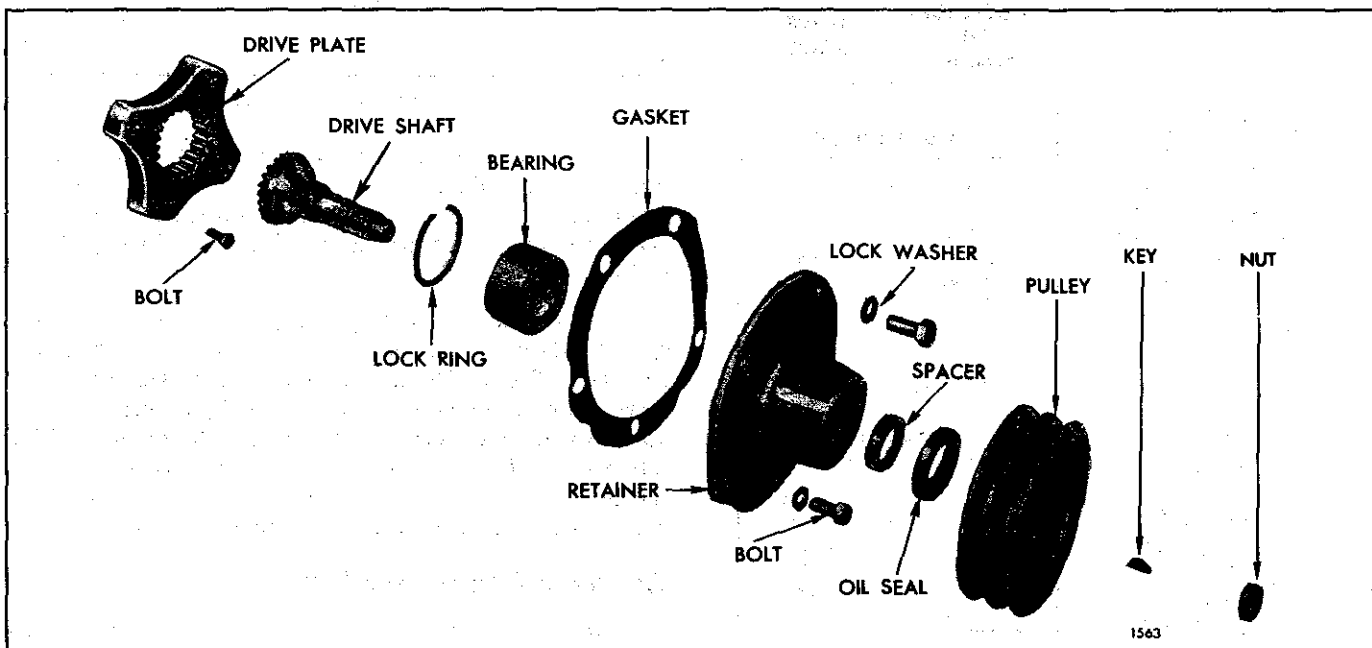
Components of Accessory Drive for Belt-Driven Accessory (Drive Plate Type)
